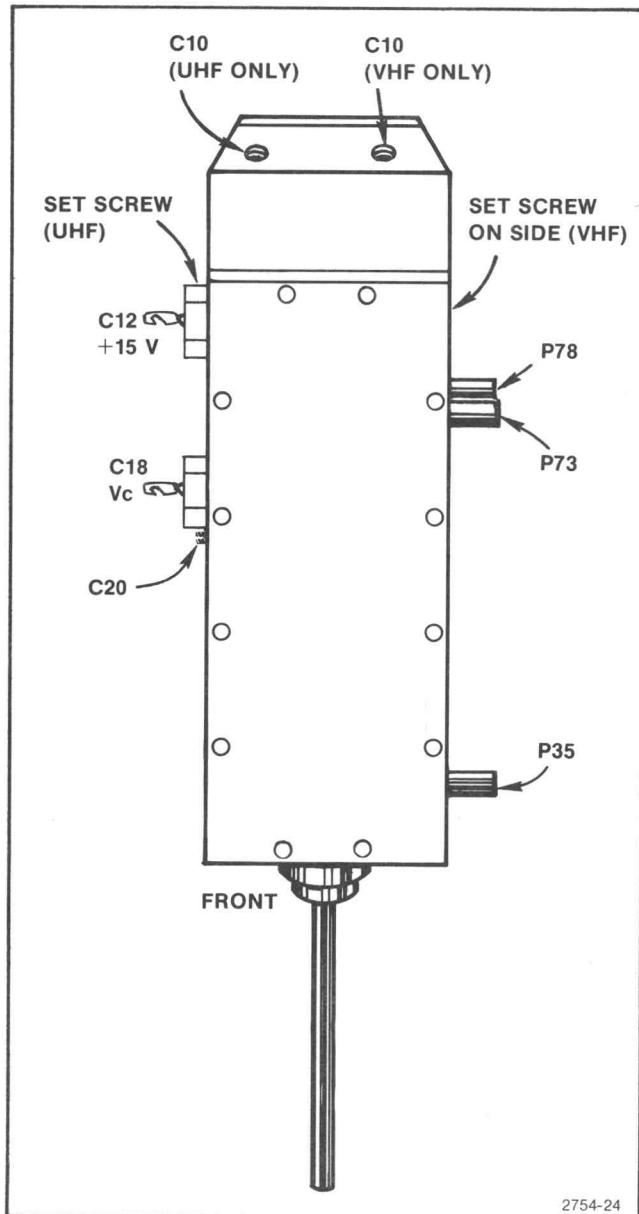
1st LO Tracking Adjustment Locations.
